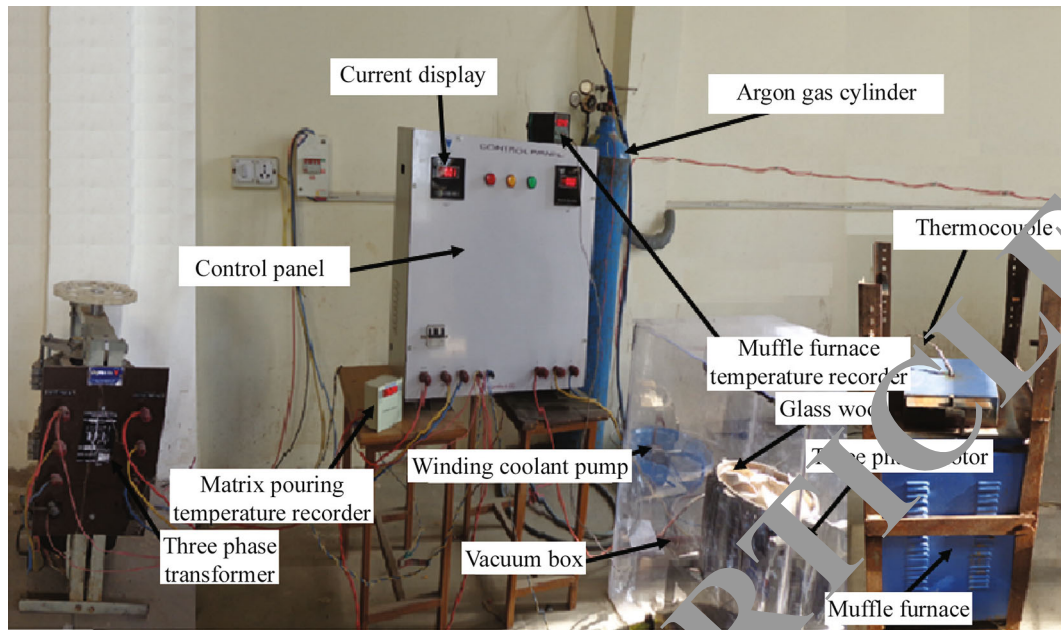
Experimental set-up of electromagnetic stir casting process [23]
